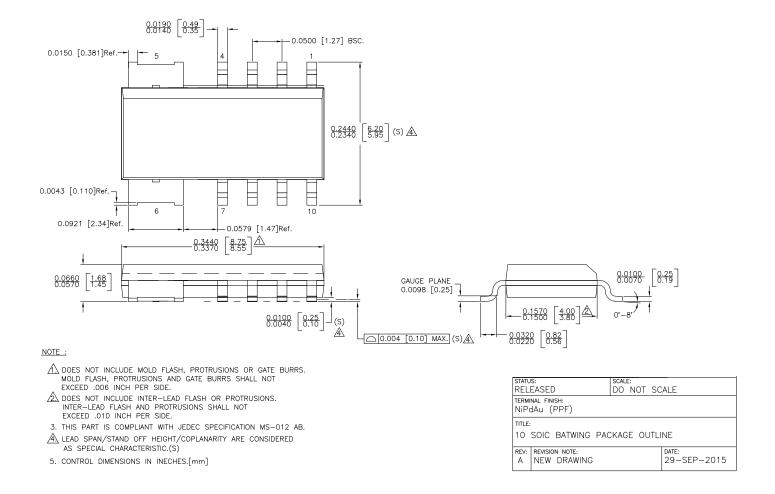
10-Lead SOIC Batwing Package Outline Drawing
